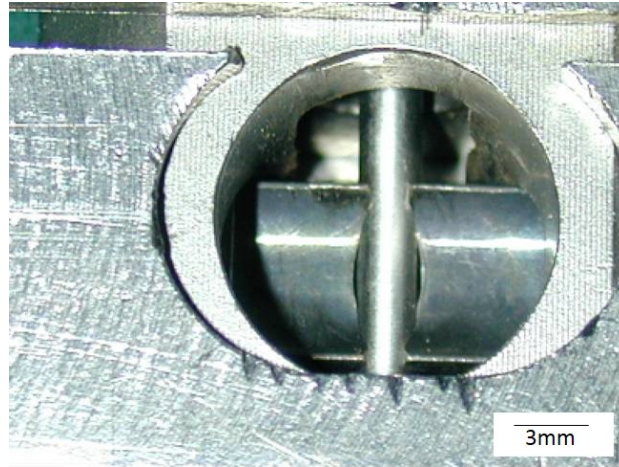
Stem and confining dies used in this study to make confined pinch weld
